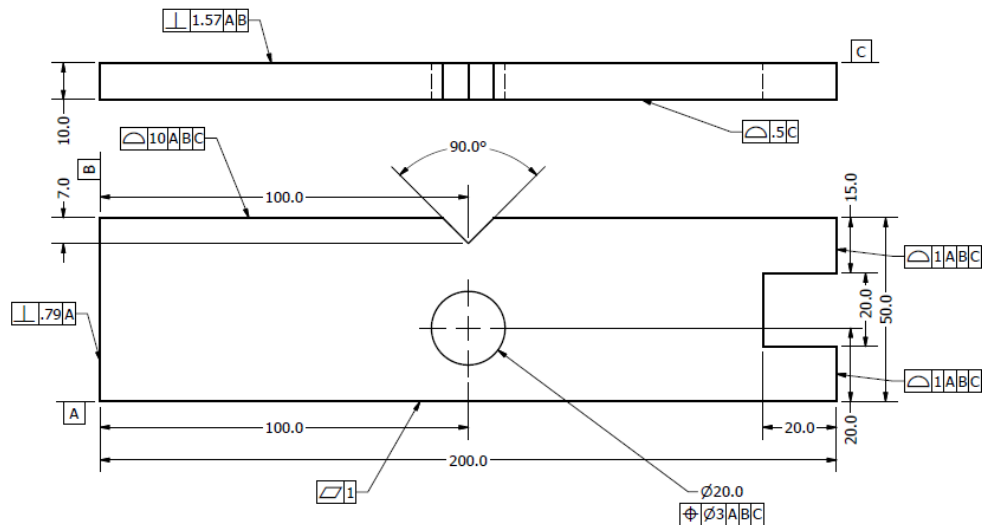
The true position tolerance added to the 20 mm diameter tolerance.
